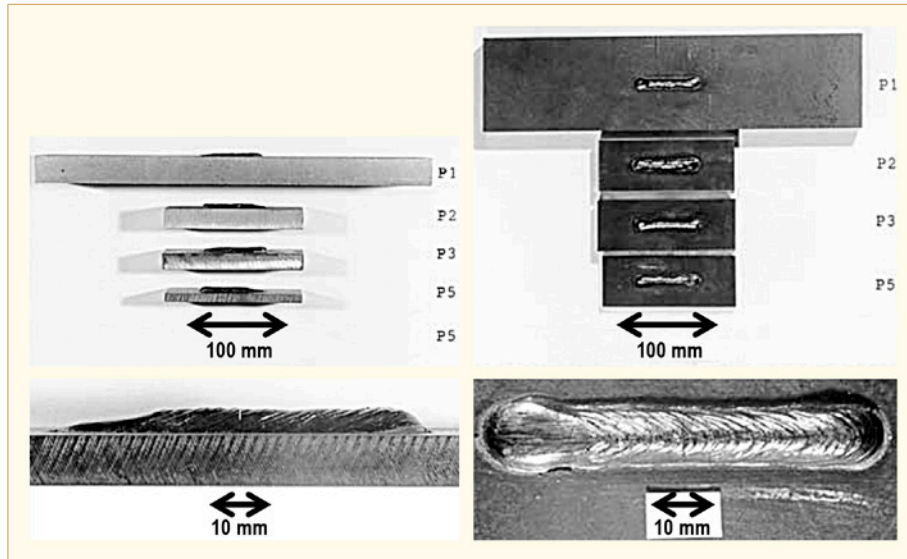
Drop-weight test specimens. Left: side view, the lower photo shows close-up of weld-bead and notch. Right: top view of the specimens, the lower photo shows close-up of weld-bead with central notch just visible as thin black line [TWI, 2015].
